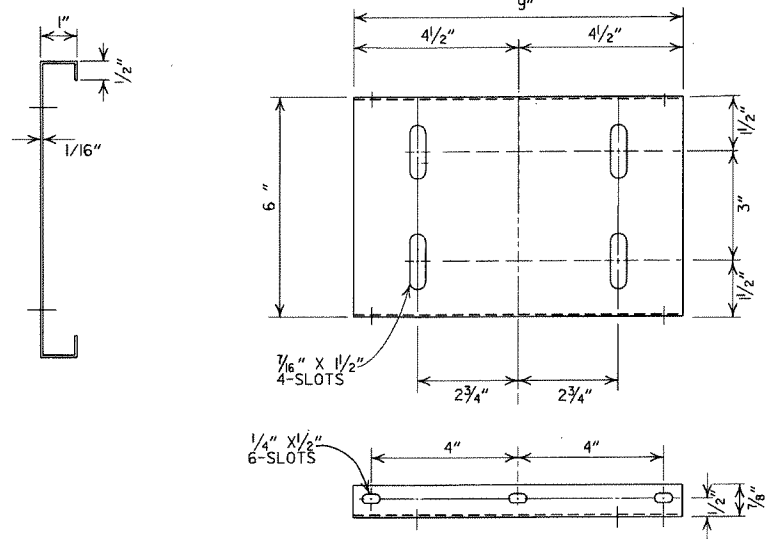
DETAIL OF TERMINAL ANCHOR POST (TYPE I)
